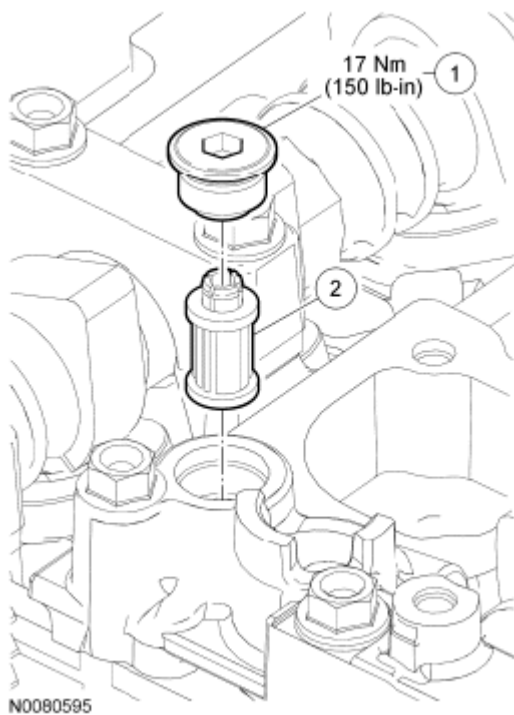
Identifying Variable Camshaft Timing System Oil Filter With Torque Specifications
